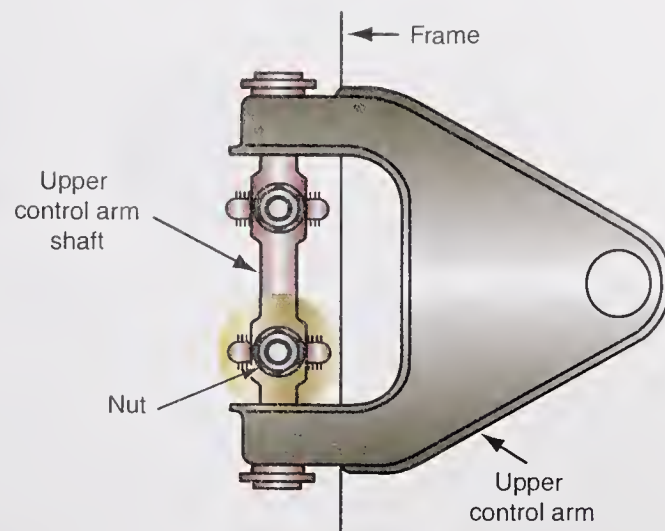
Elongated bolt holes for upper control arm shaft bolts provide camber adjustment on some short-and-long arm front suspension systems.
